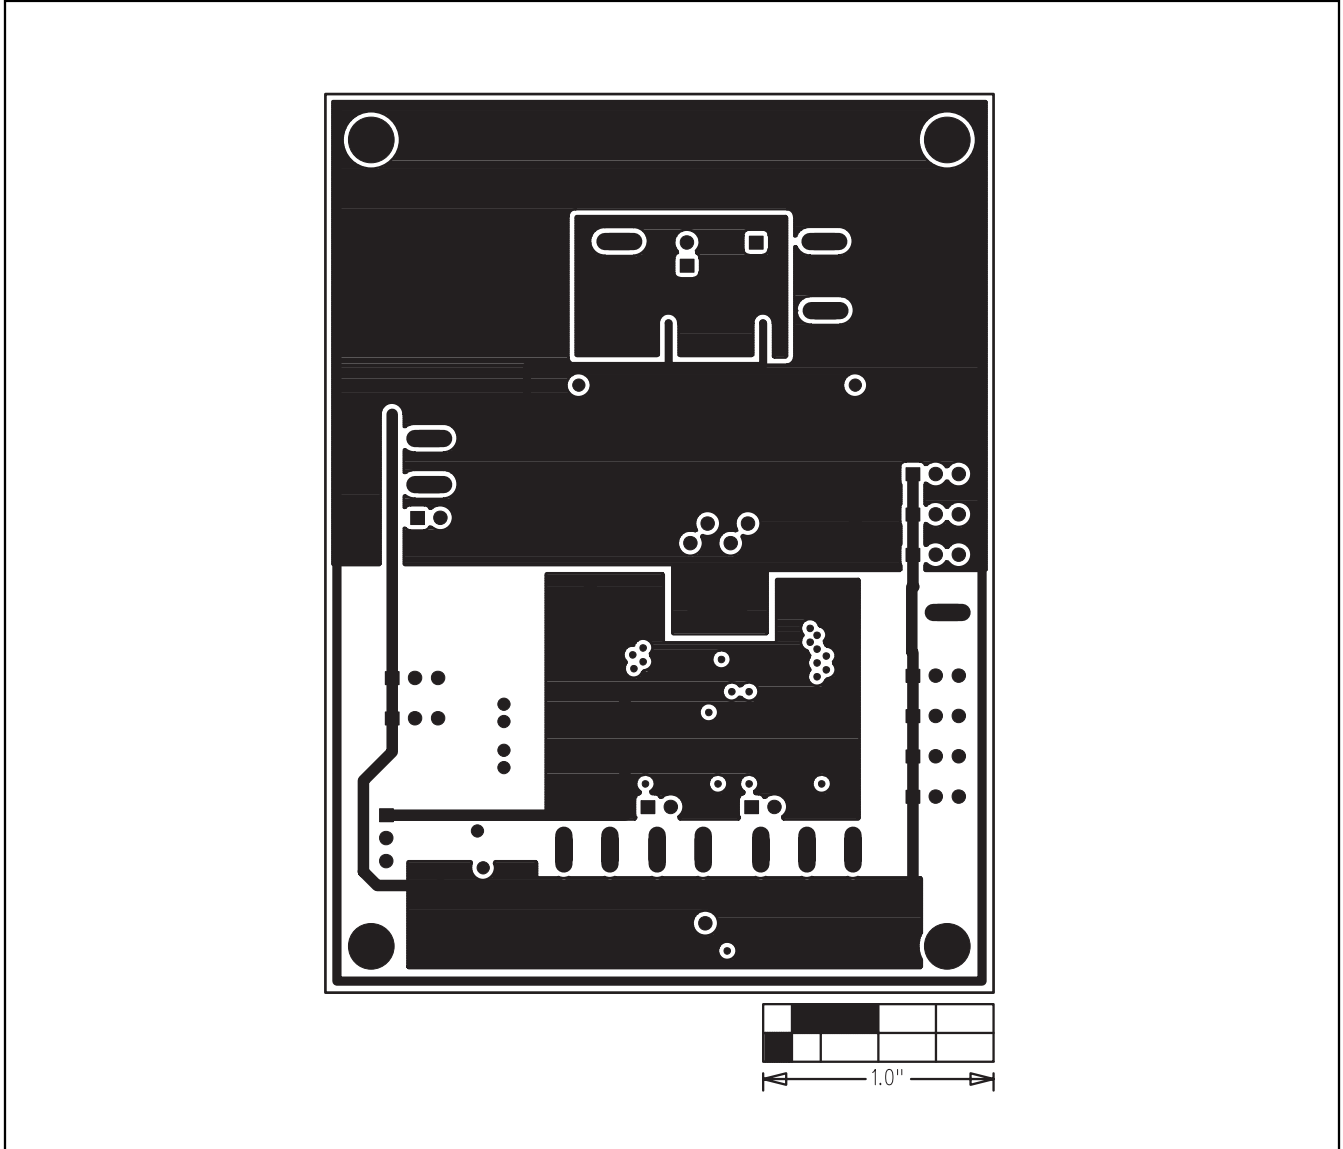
MAX9708 EV Kit PCB Layout—VDD Layer 3
